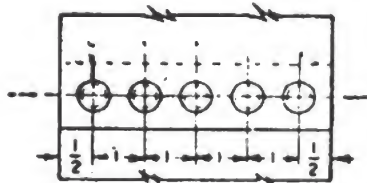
Spot welding symbol showing use of combined dimensions.
